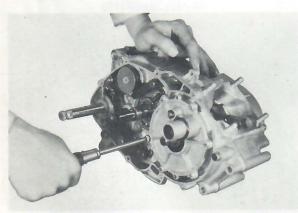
Loosening outer valve seat fitting screws with cross head screw driver
